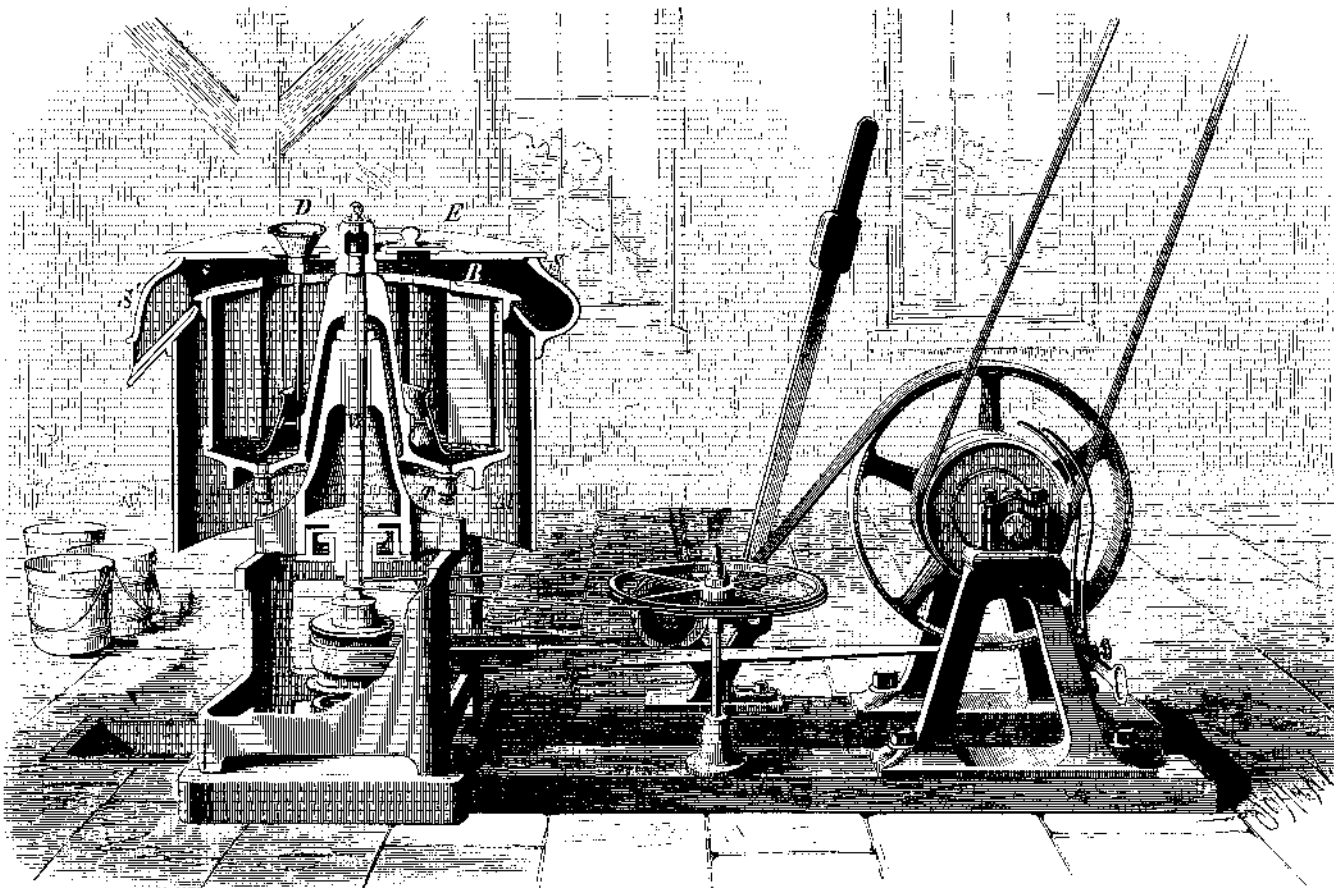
LEFELDT AND LEUTSCH'S CENTRIFUGAL MILK-SKIMMING MACHINE.
